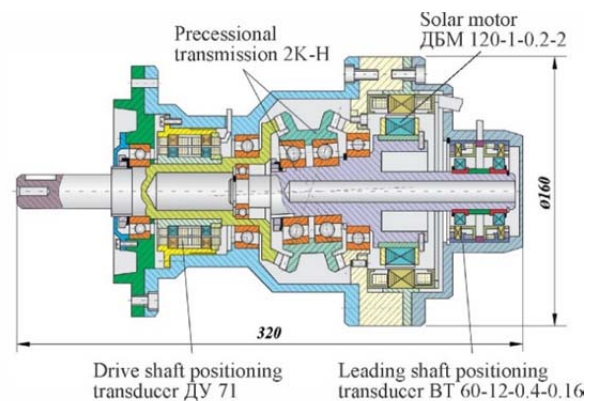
Precessional electromechanical module with toothed gear ($i=-279$) for the operation of the space flight technique.
